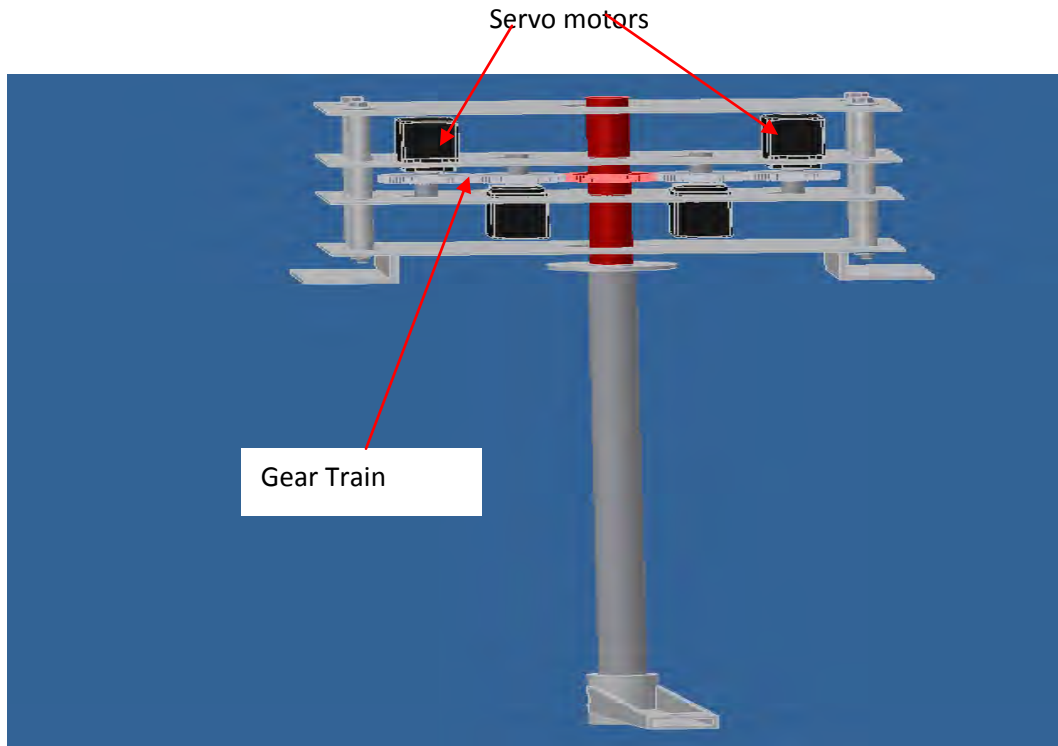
CAD Drawing of the Pulley System for the Steering Mechanism
